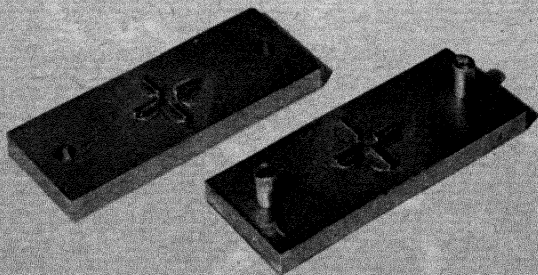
Press-tool for making strip-joints shown in Plate 16. (Photographs in this section by courtesy of the Research Laboratories of The General Electric Company, Limited, Wembley, England).
